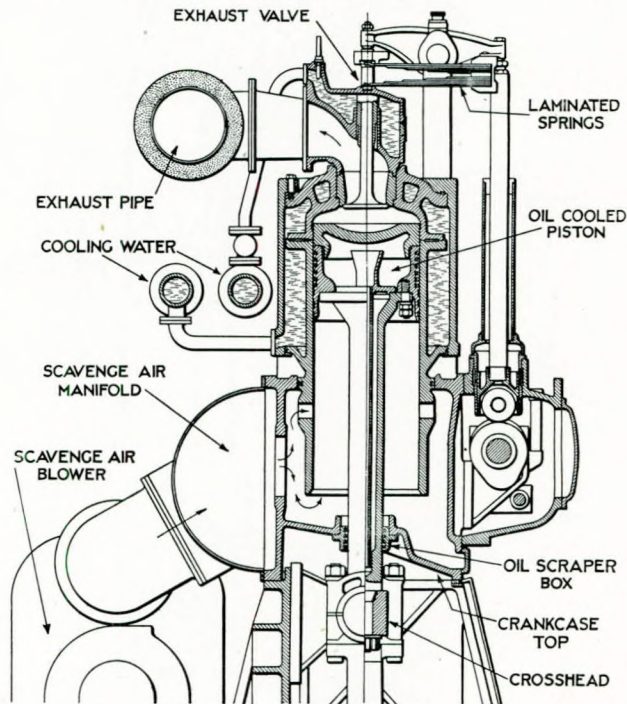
B.—Alternative single-acting two-cycle crosshead engine.
